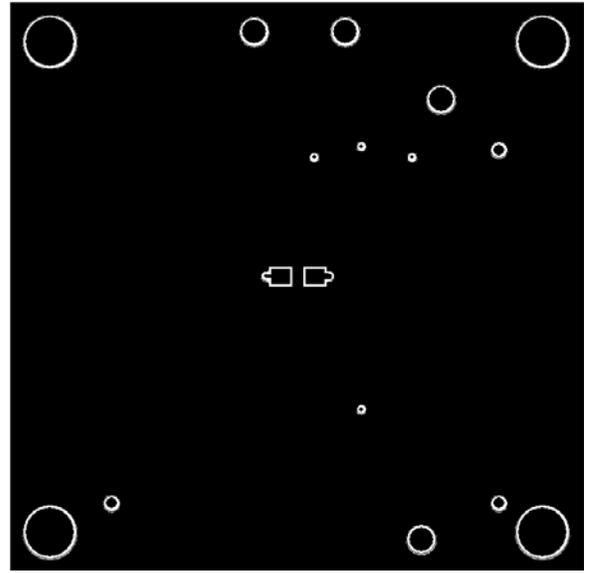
ADA4830-1BCP-EBZ Board Layout Pattern, Secondary Side
